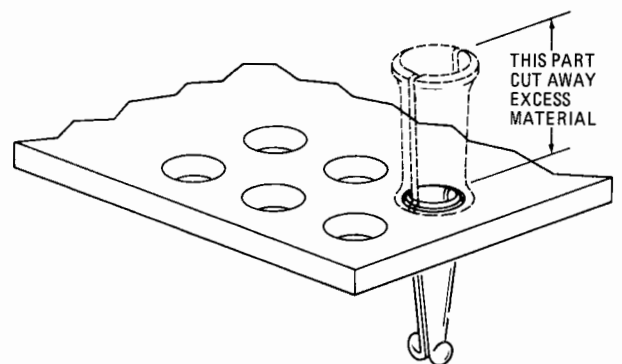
HOW FLUSH-MOUNT SOCKET CAN BE MADE by removing the top part of a miniature tubular terminal and peening over.
